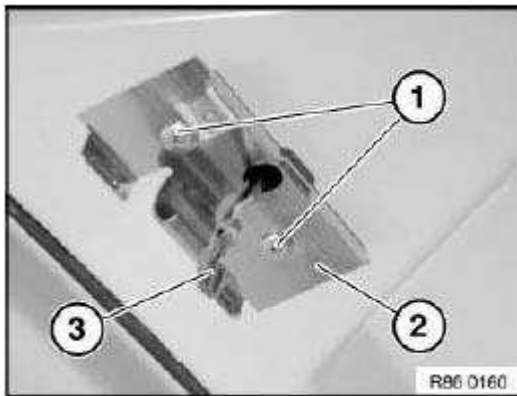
Identifying Rivets, Inside Light Mounting Bracket & Flat Connector
